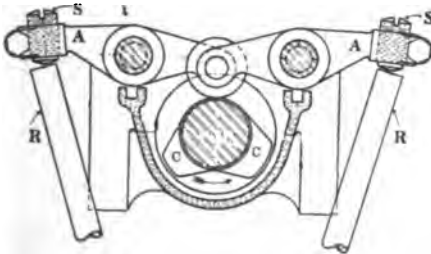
Setting of adjustable set screw (S) in rocker arm (A) in relation to the valve stem (R). In other words the method of setting valve-clearance on all types of Hall-Scott engines. The clearance should be .020" when valves are seated.
